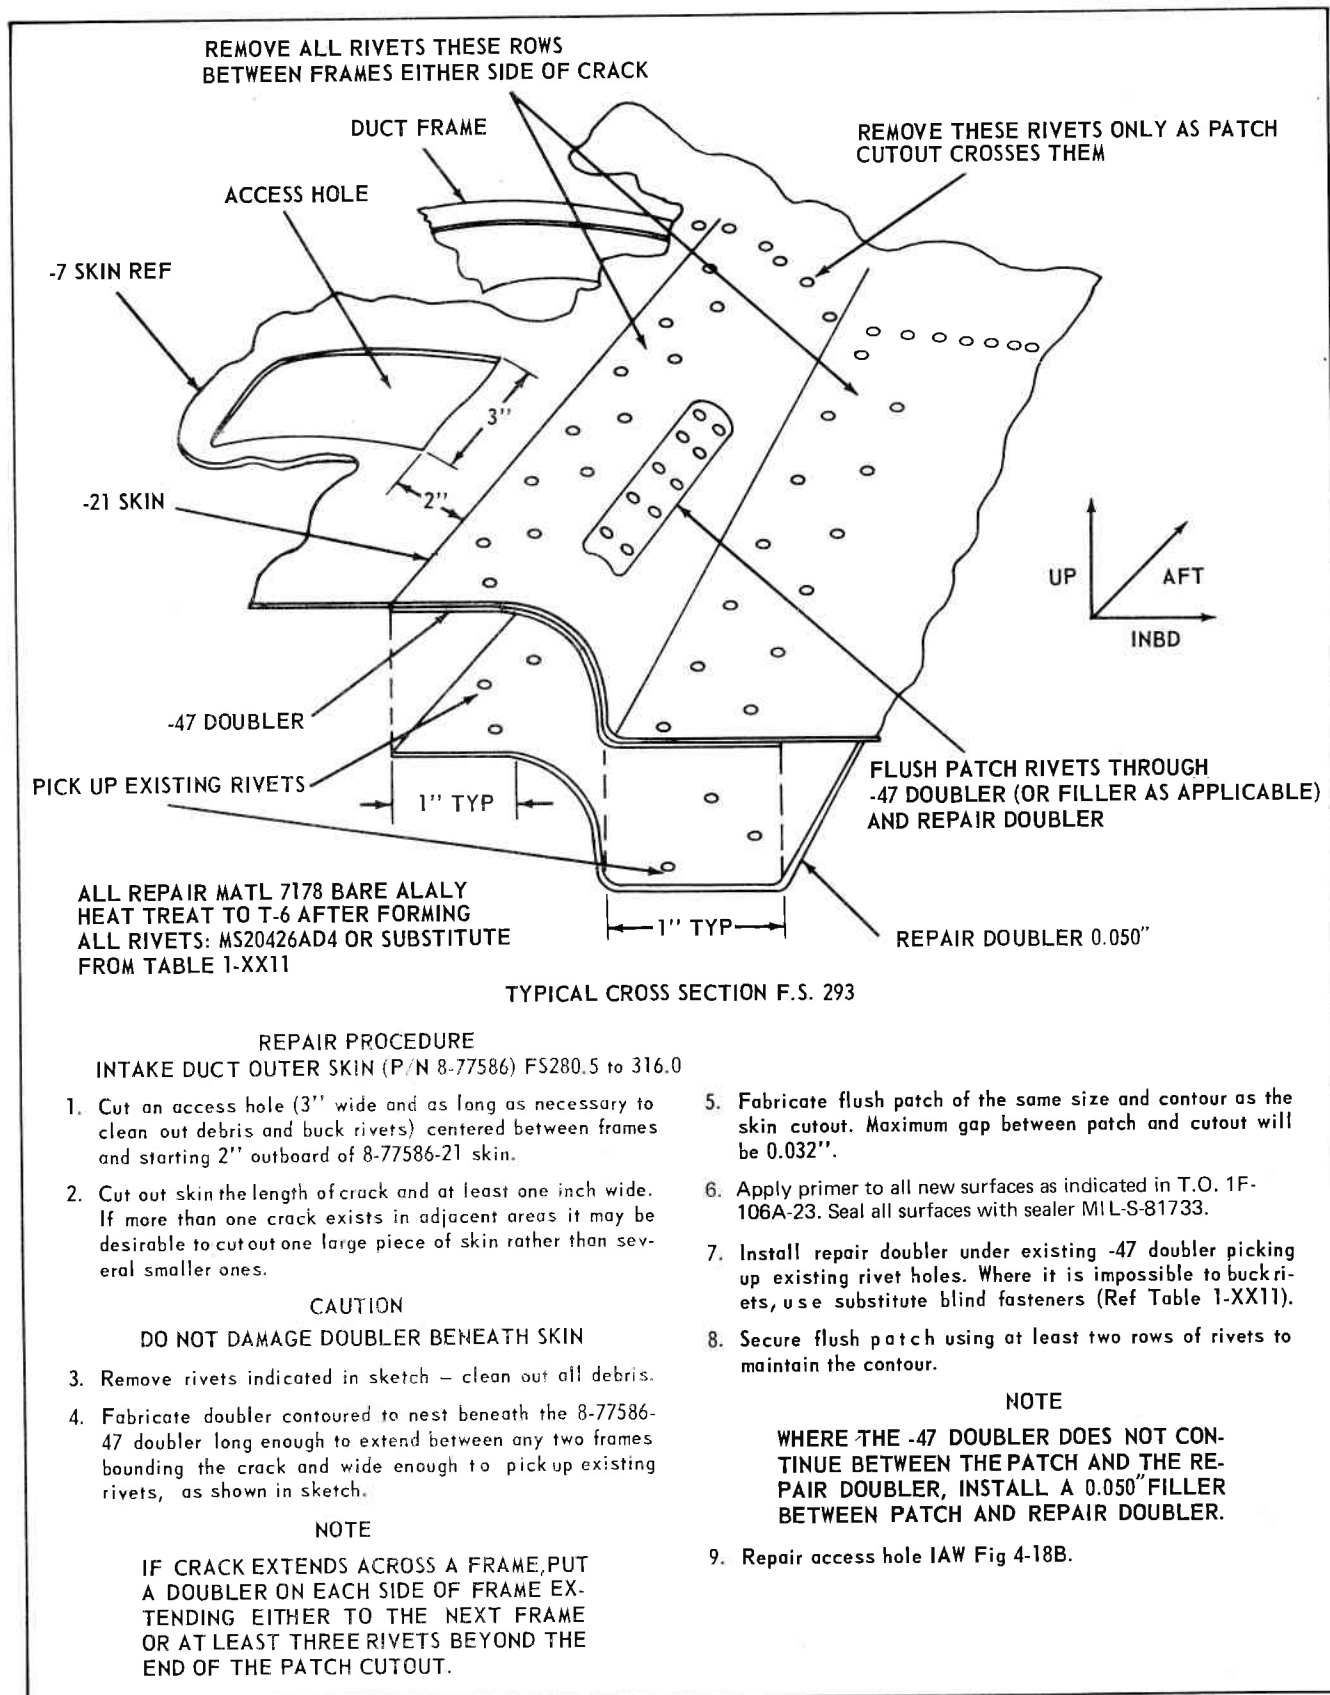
E. Air Intake Outer Skin (P/N 8-77586) Repair F.S. 280.5-316.0
